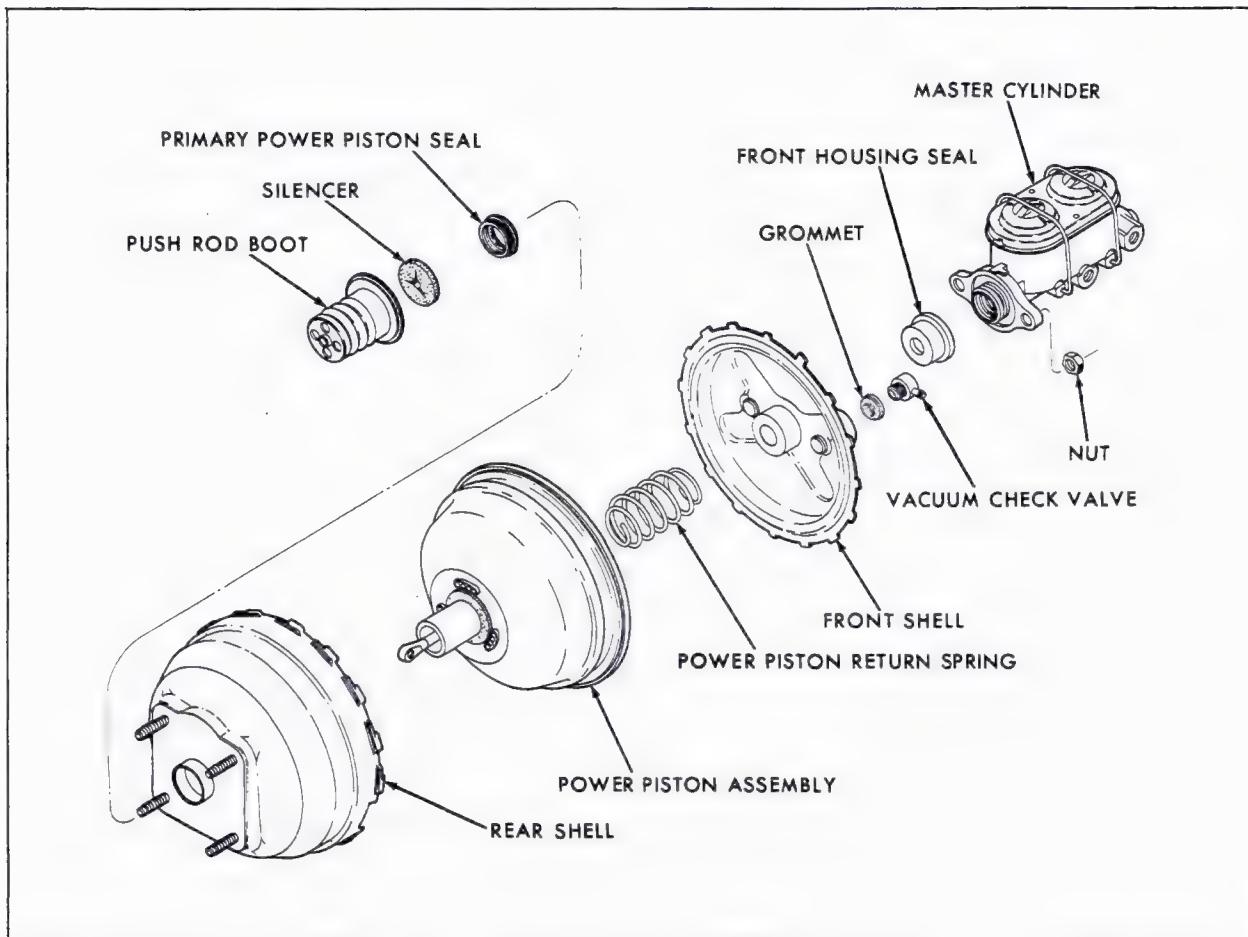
Tandem Diaphragm Power Head Disassembled
